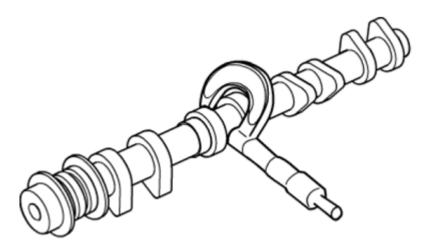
Checking Camshaft Housing Inside Diameter Courtesy of SUZUKI OF AMERICA CORP.
